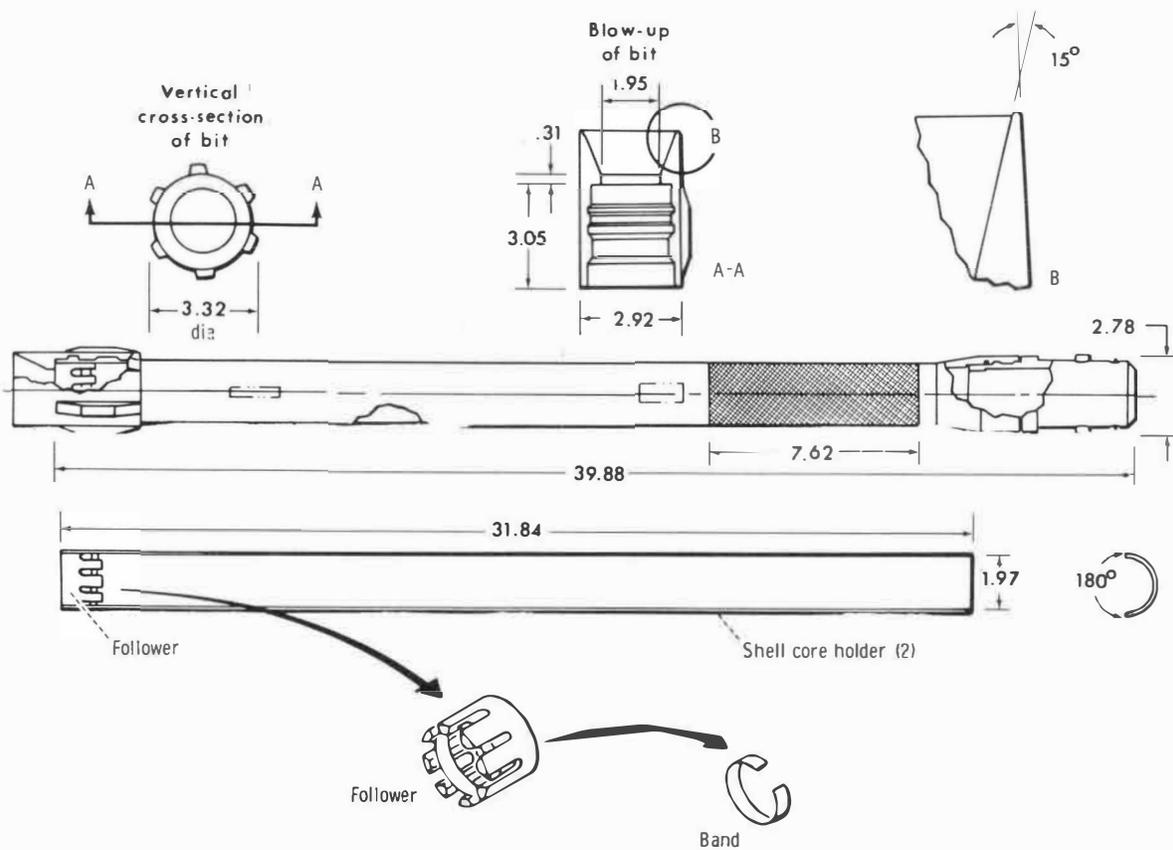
Core tube sampler and bit used on the Apollo 11 mission (measurements in centimeters).
